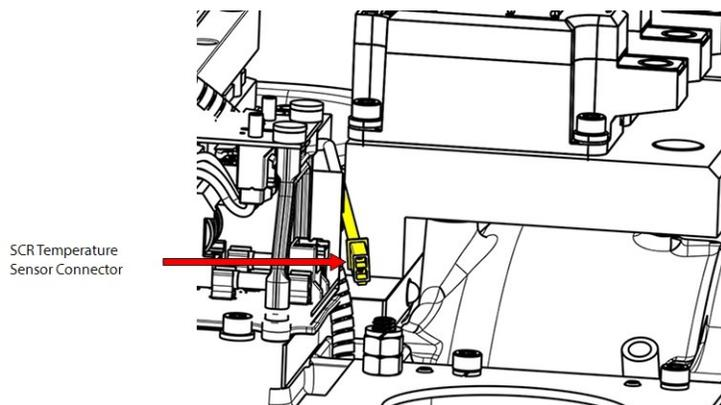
SCR Temperature Sensor Removal - TTS300/TGS230
